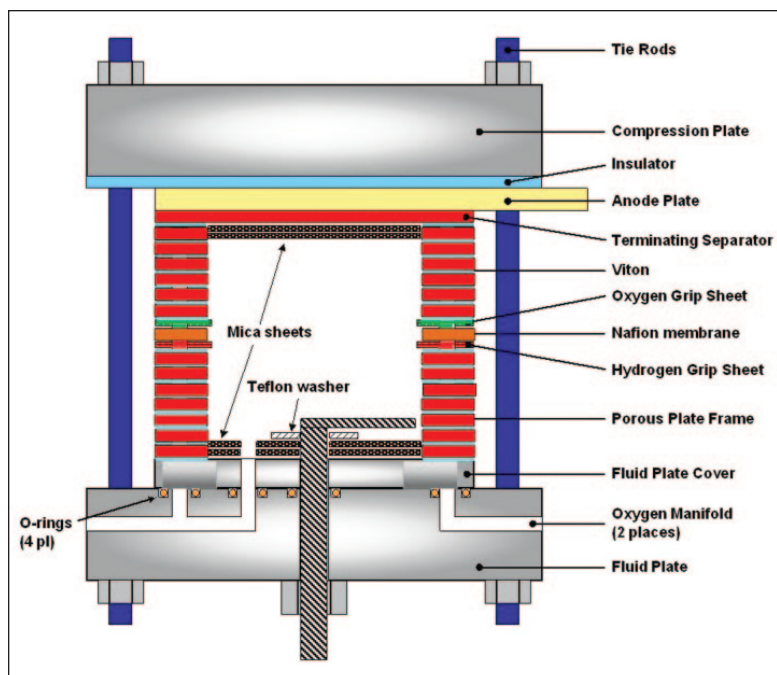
Test article to be ignited inside by welder arc.
